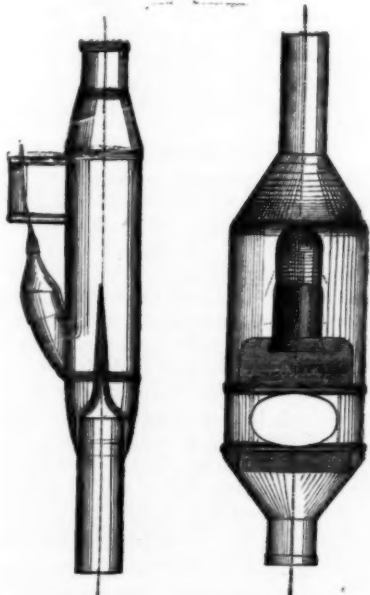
Valve Box of Ronquayrol's Apparatus. Fig. 4.—Valve Box, Enlarged and in Section.
